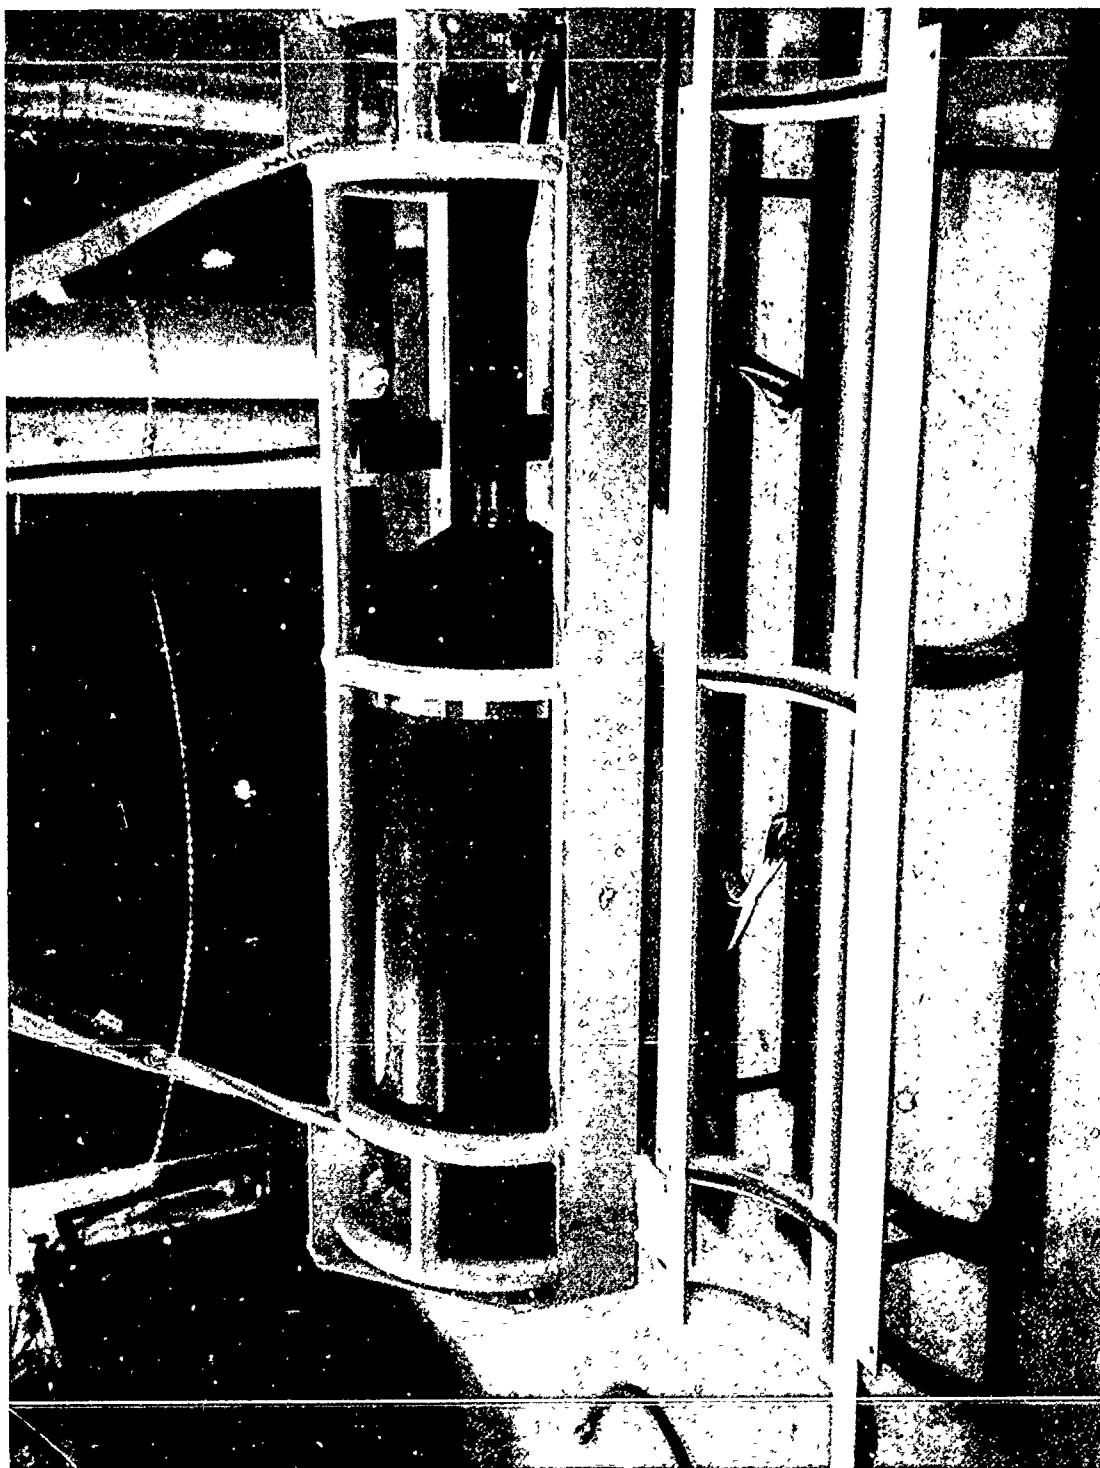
Lifting the short housing with the upper half of cage fixture (after securely gripping the housing with pneumatically inflated elastomeric actuators) and placing it into the lower half of the cage fixture.
